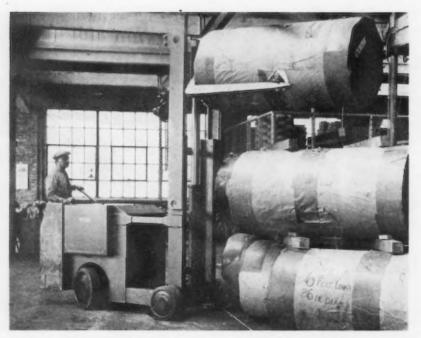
This finger truck for handling paper rolls is of welded construction throughout.
